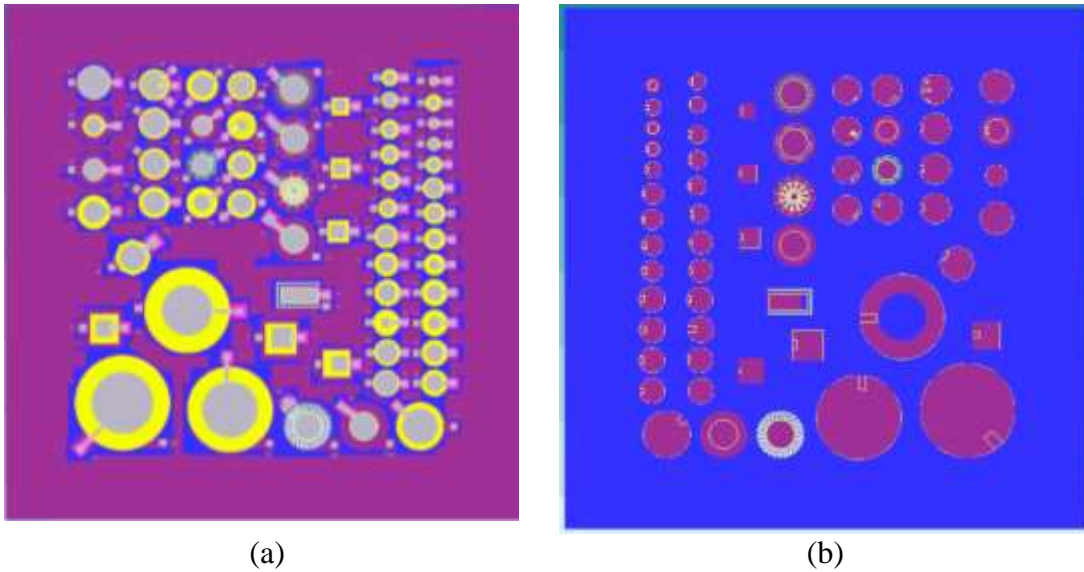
~ Early versions of the prototype experimentation device showing (a) the front side and (b) the backside of the die.
